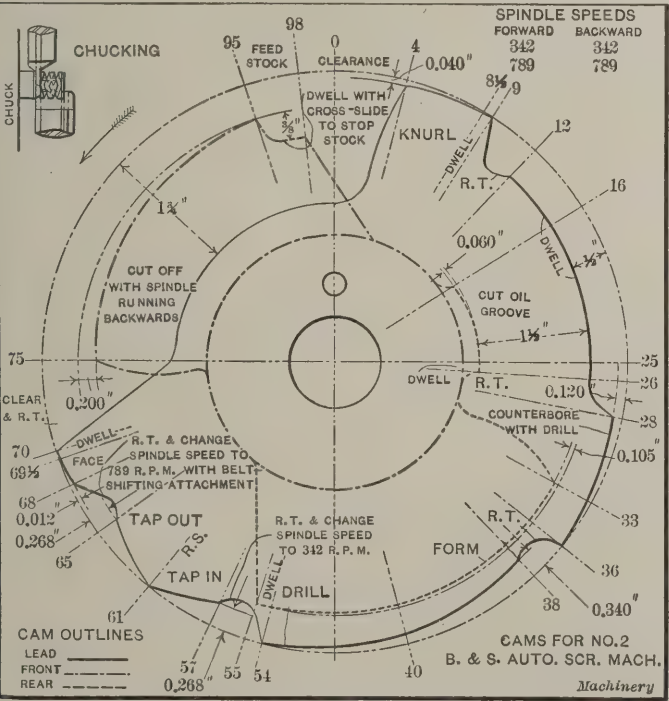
Cams used in Making and Cutting the Oil Groove in the Needle Bar Connection Pin shown at *A* in Fig. 7
